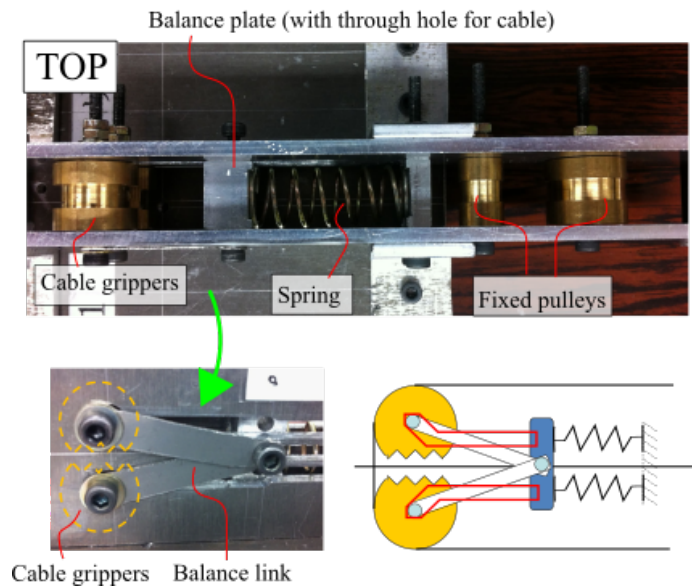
Prototype of the cable-driven LRT with split pulley clutch
